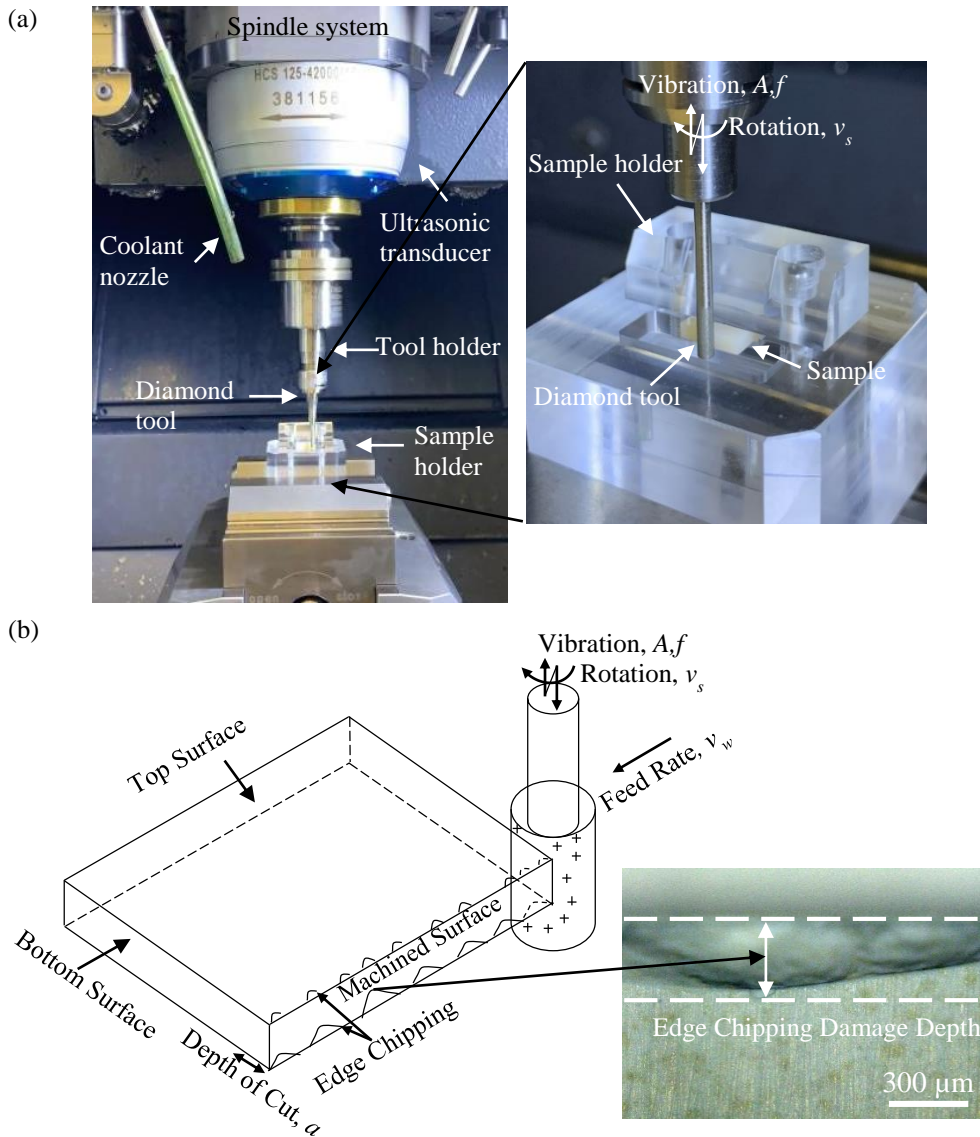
(a) Experimental setup for conventional and ultrasonic vibration-assisted diamond machining and (b) Sample-diamond tool movements for surface machining, machining-induced edge chipping damage on both top and bottom sample surfaces perpendicular to the machined surface, and edge chipping damage depth measurement.
